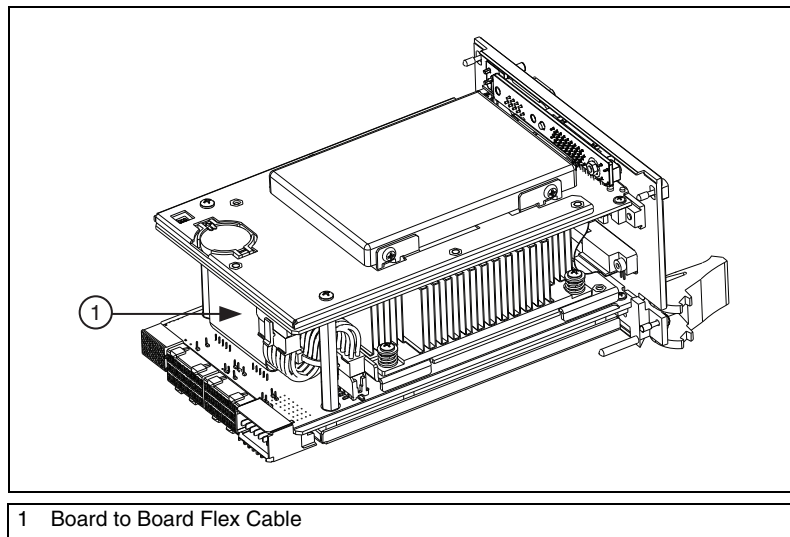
View of the Controller Back End with Board to Board Flex Cable
